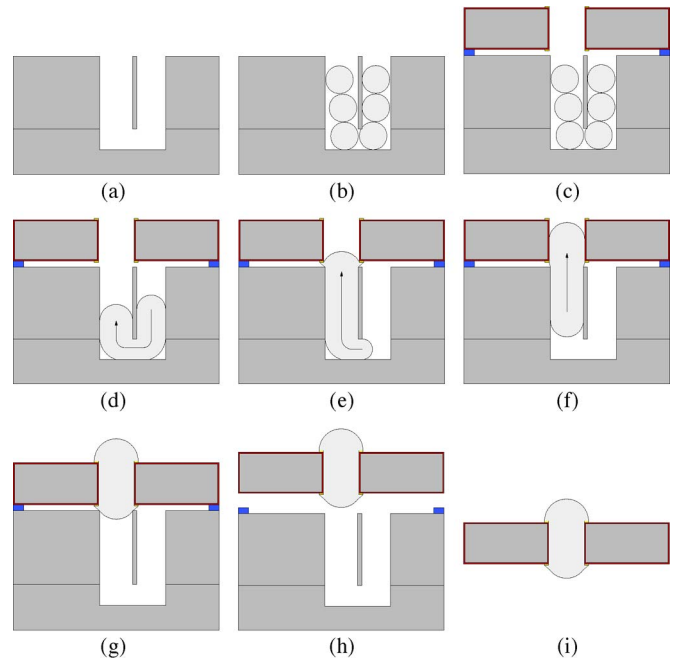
Solder pump procedure for TSV fabrication. (a) Assembly of the reservoir structure. (b) Solder ball loading. (c) Mounting of the device die. (d)–(g) Driven by surface tension, the liquid solder travels along the microtube in the reservoir structure and is injected into the via hole during reflow. (h) Device die and reservoir structure separation. (i) Formed TSV in the device die.
